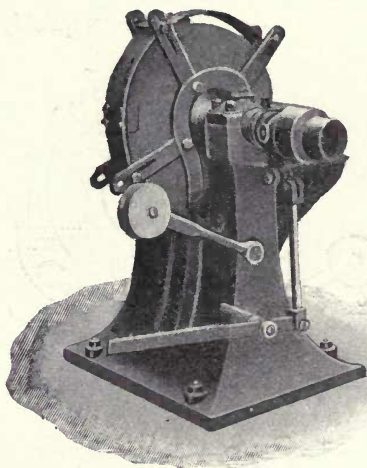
Naxos Union Grinding Machine with Protecting Guard.
